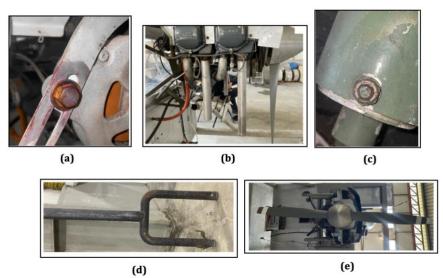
Type of aircraft components (a) Uncoated Bolt and Nut; (b) Modified Exhaust Engine; (c) Coated Bolt and nut; (d) Towing Bar; (e) Propeller Blade
